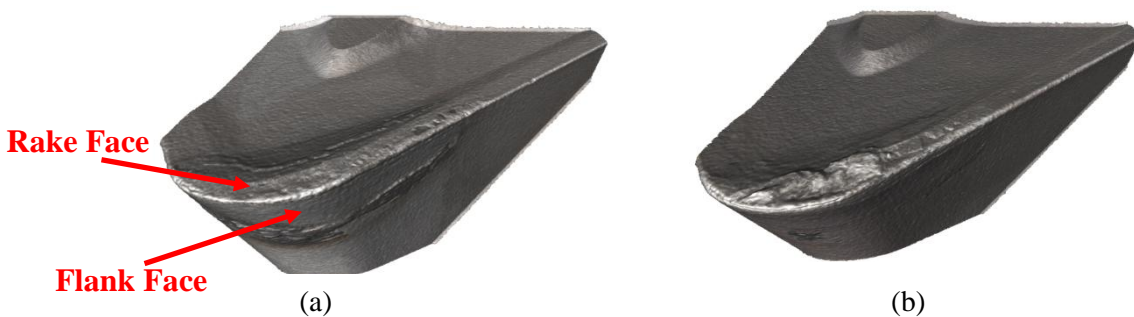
3D images of worn tool after 1000 m cut: (a) uncoated insert (b) TiAlN coated insert [Provided by Kobe Steel Ltd.]
